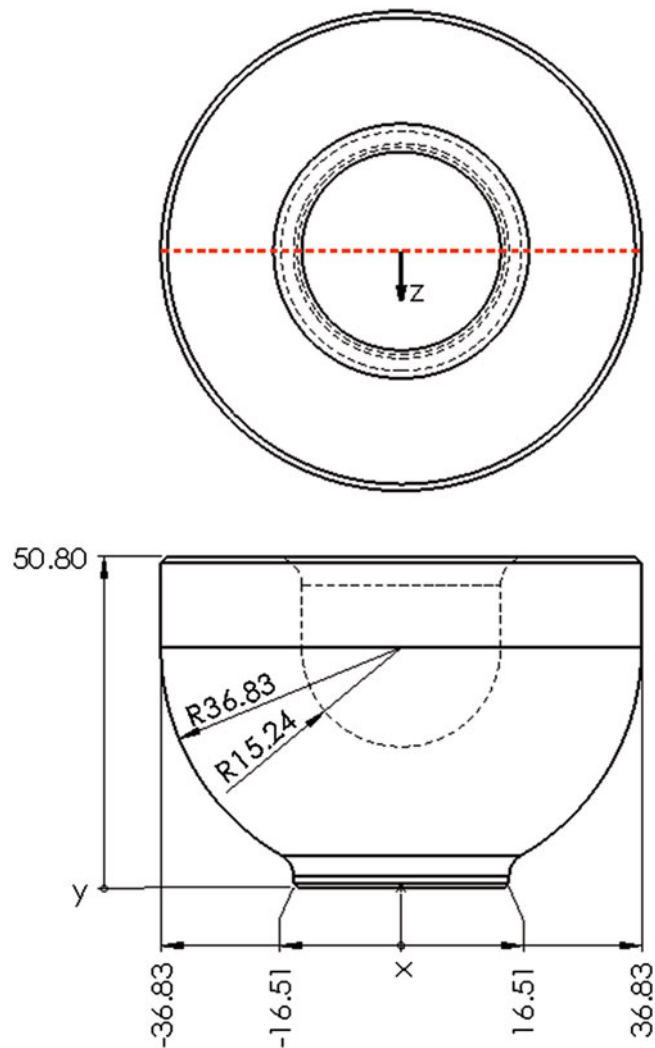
Stainless steel forging dimensions and measurement location (dimensions in mm)
